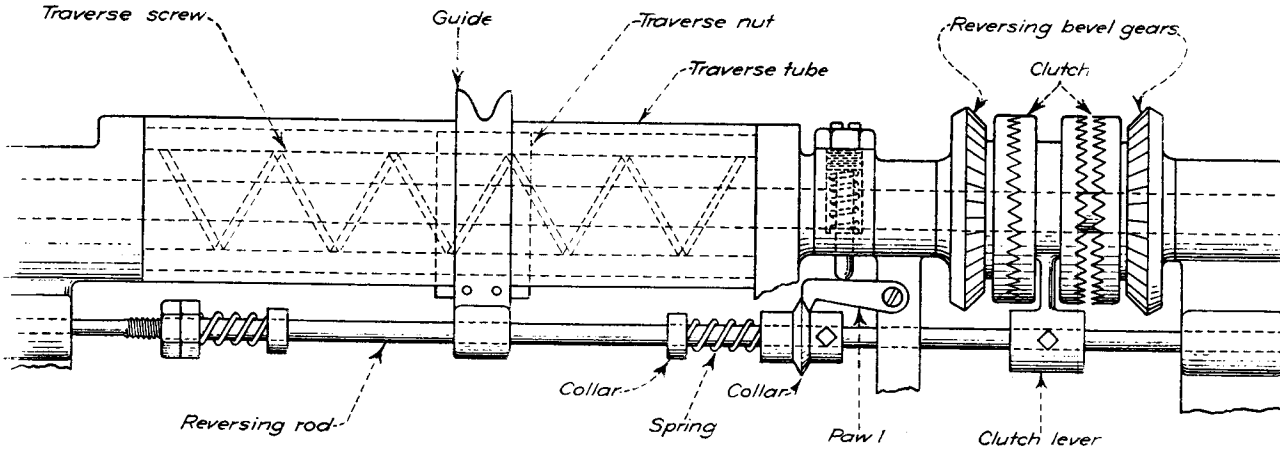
Reversing bevel gears which are driven by a common bevel gear, drive the shaft carrying the traverse screw. Traverse nut mates with this screw and is connected to the yarn guide. Guide slides along the reversing rod. When nut reaches end of its travel, the thread guide compresses the
